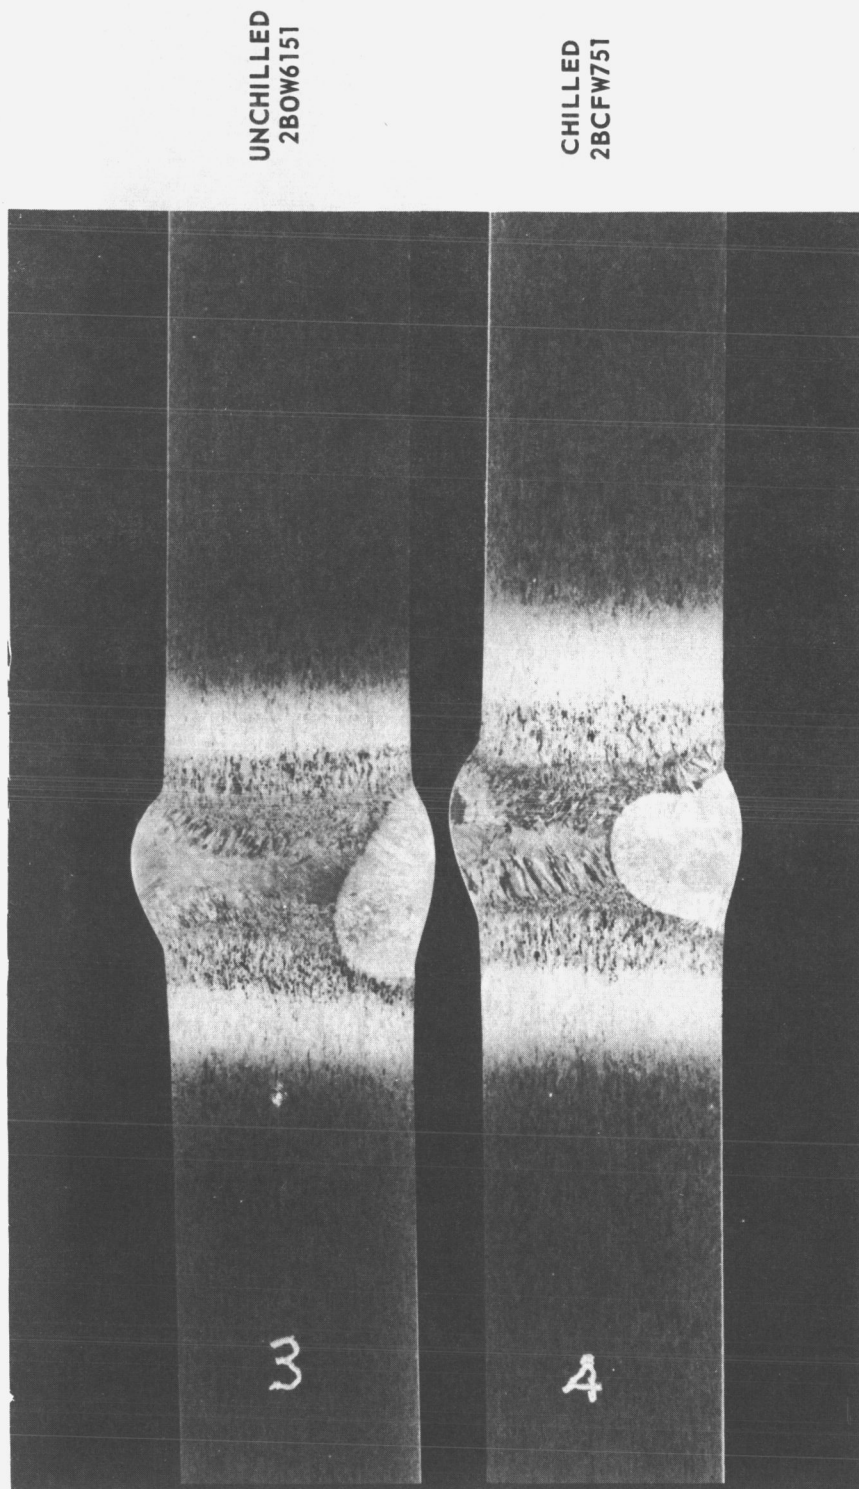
MACROSECTIONS SHOWING EFFECT OF FRONT-SIDE CHILLING OF WELDS
